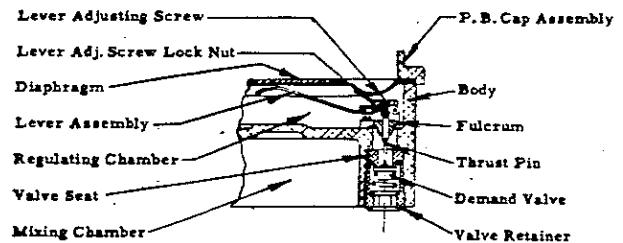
SECTIONAL VIEW - SECOND STAGE DEMAND VALVE ASSEMBLY
